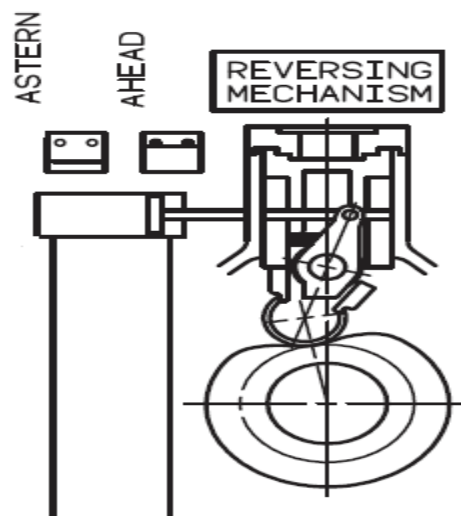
Fuel Pump Reversing Mechanism [1]
